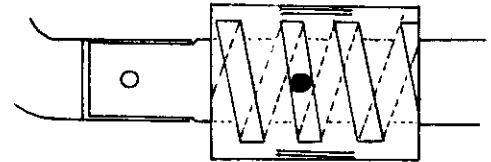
Acme Threading. The black dot is an extruded pin, 1/8" high and 1/16" in dia.
